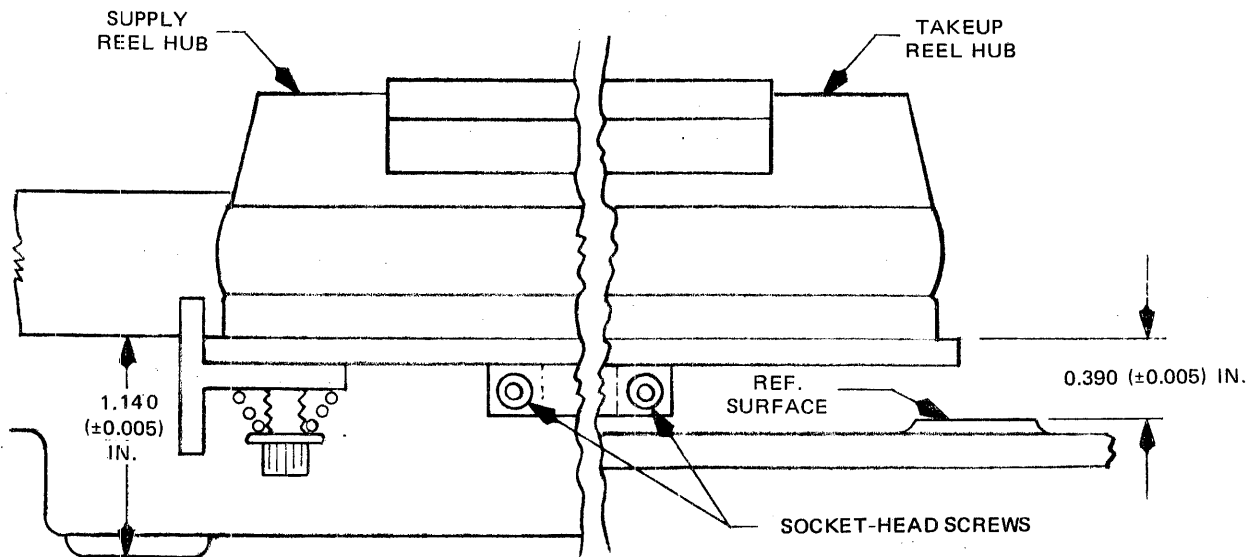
Reel Hub, Showing Adjustment Dimension
